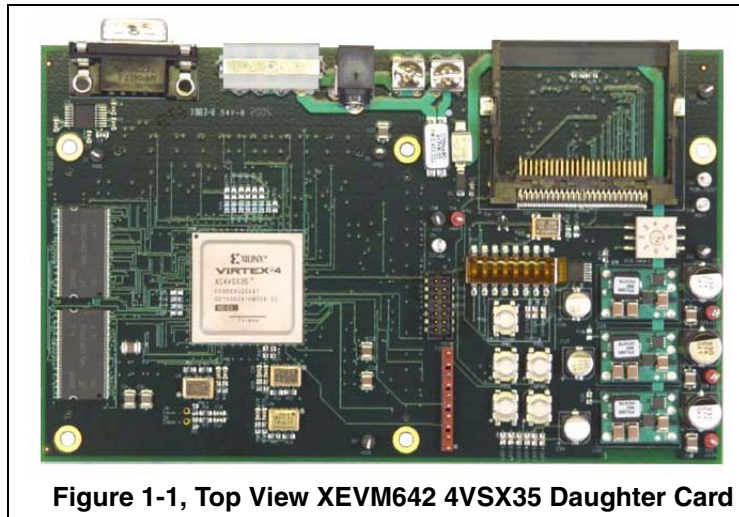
, Top View XEVM642 4VSX35 Daughter Card
